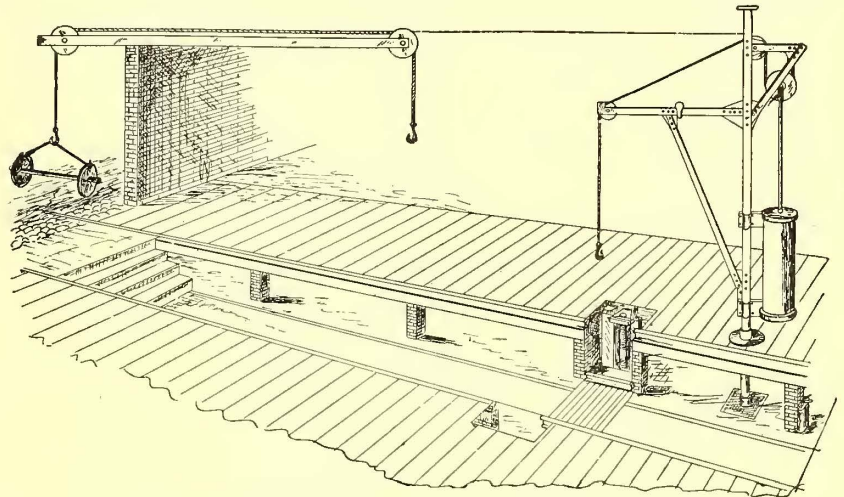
AIR CRANE AND PIT, WITH ELECTRIC ELEVATOR
